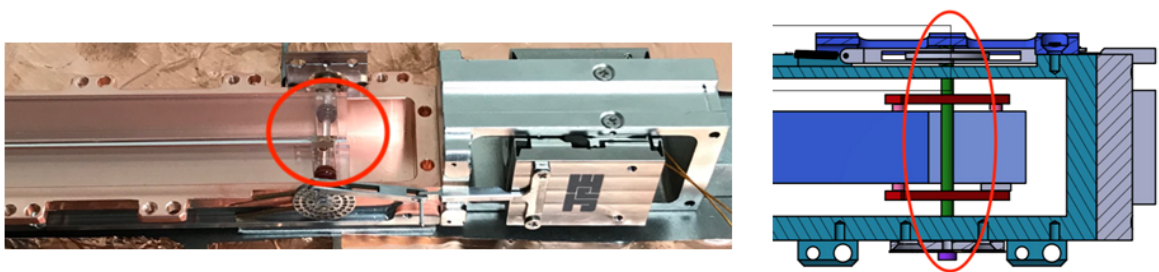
Photograph (left) and technical drawing (b) of the broken shaft of the tuner plates in cavity 4 indicated by red circles.
